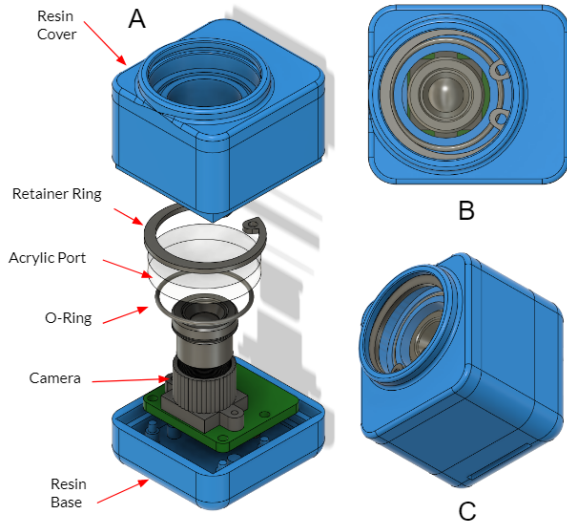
An exploded view of the camera housing. The light housing has a similar pressure seal and port design, whereas the controller and battery housing
